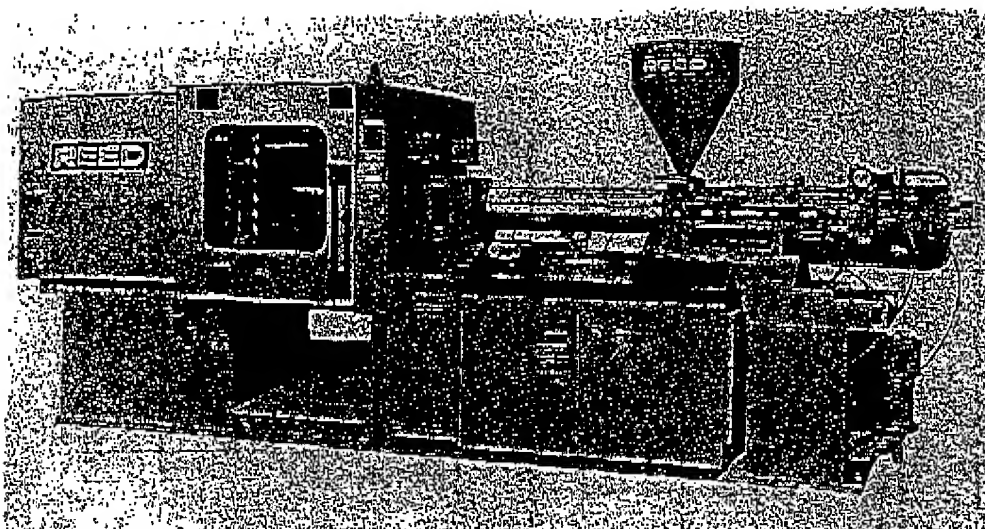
A 300-t injection-molding machine with a 6.35-cm (2½-in.) reciprocating screw. Courtesy of Reed-Prentice Division, Package Machinery Company.
